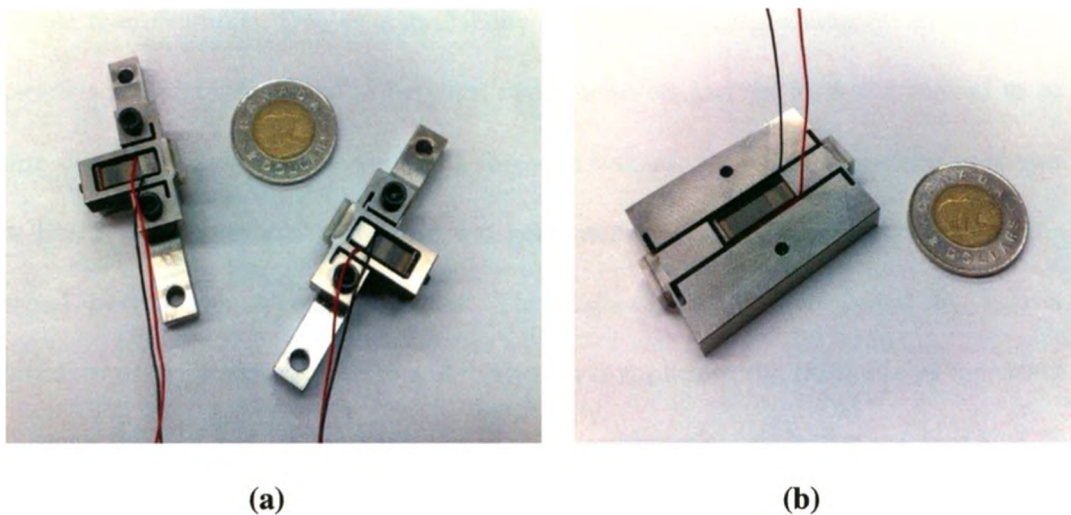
3. Photographs of fabricated and assembled clamps: (a) NC clamps, (b) NU clamp.
